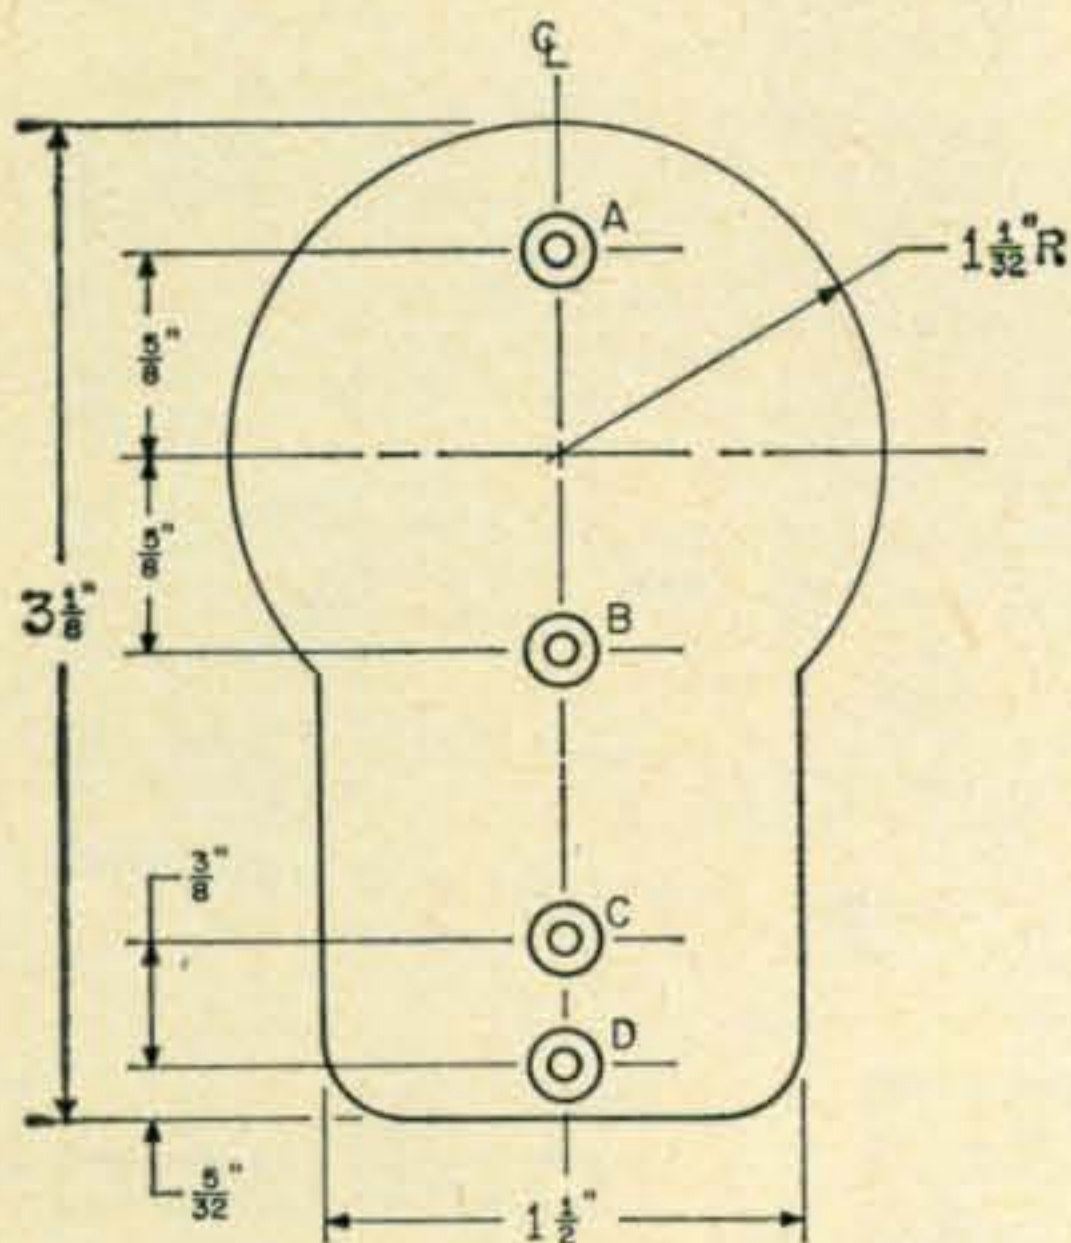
Bottom view of the base plate fashioned from 1/8" hard aluminum. Holes A, B, C and D, are drilled and countersunk for 4-40 flat head screws.
